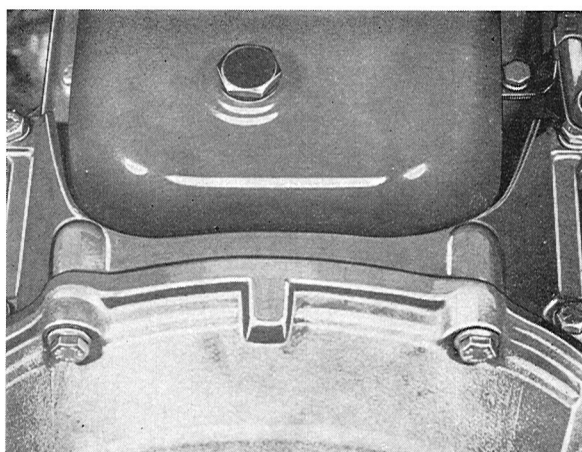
Reinforcing bracket, cylinder block—flywheel housing
